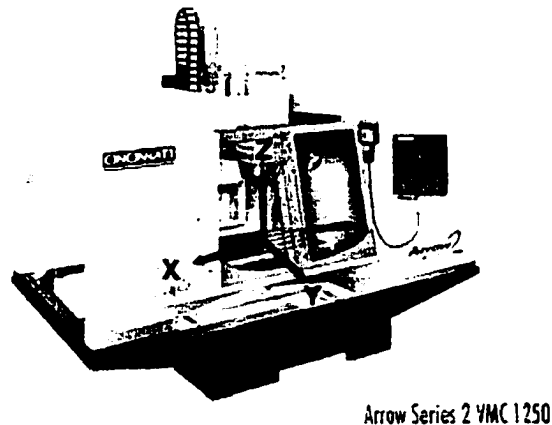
Diagram of a 3-Axis CNC Vertical Milling Machine
